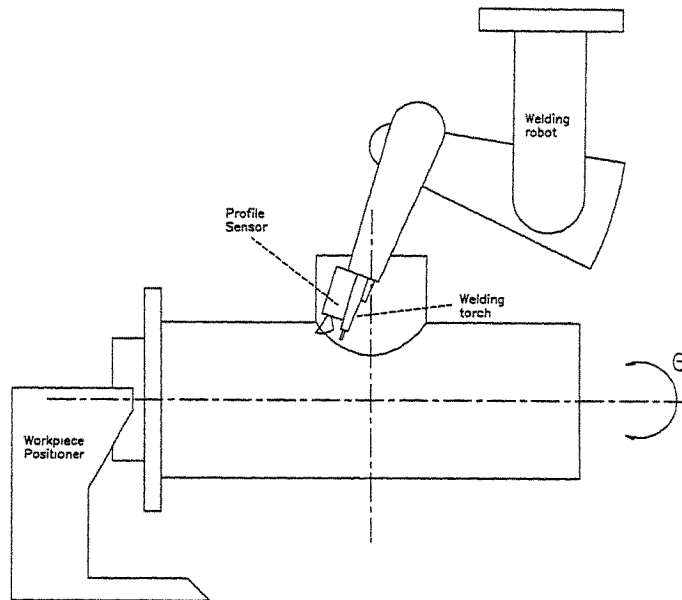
An example of a product to be welded with the control system presented in ref. 9 together with its main hardware components.
